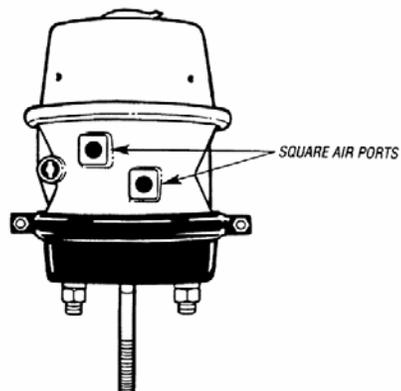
Gold Seal & Life Seal Long Stroke Spring Brake
